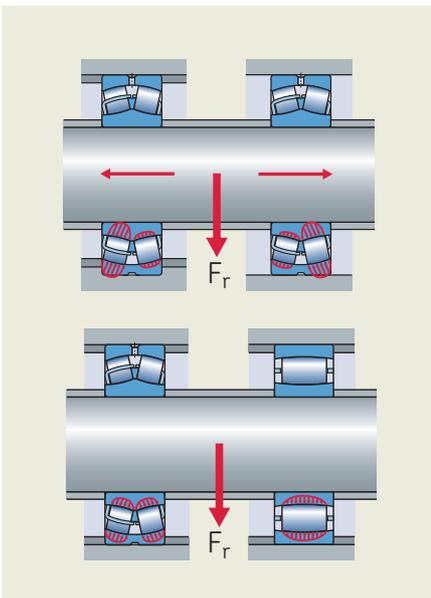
A traditional plain press roll bearing arrangement with two spherical roller bearings will generate internal axial loads because of the friction and housing deformations. This phenomenon can be eliminated by using CARB as the non-locating bearing.
